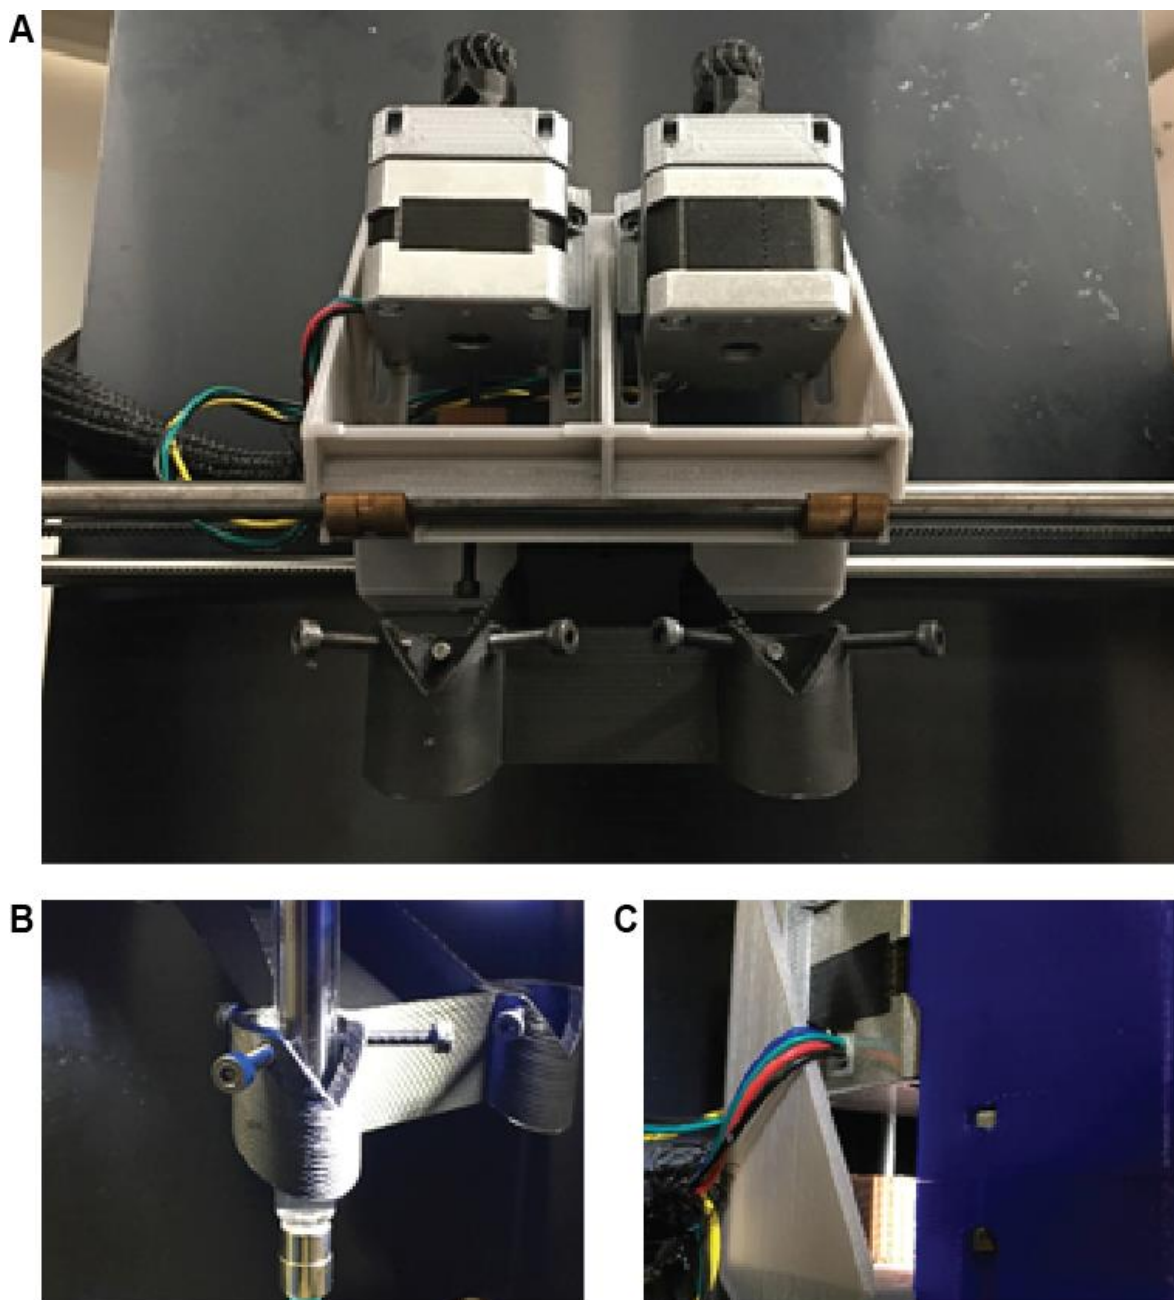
Construction of dual extruder mount with adjustment screws. (A) The dual extruder replaces the carriage used to shuttle the thermoplastic extruder. (B) The syringe of each extruder is adjusted in XY via three adjustment screws. (C) Each extruder is adjusted in Z via a single adjustment screw that pushes the motor up and down.
